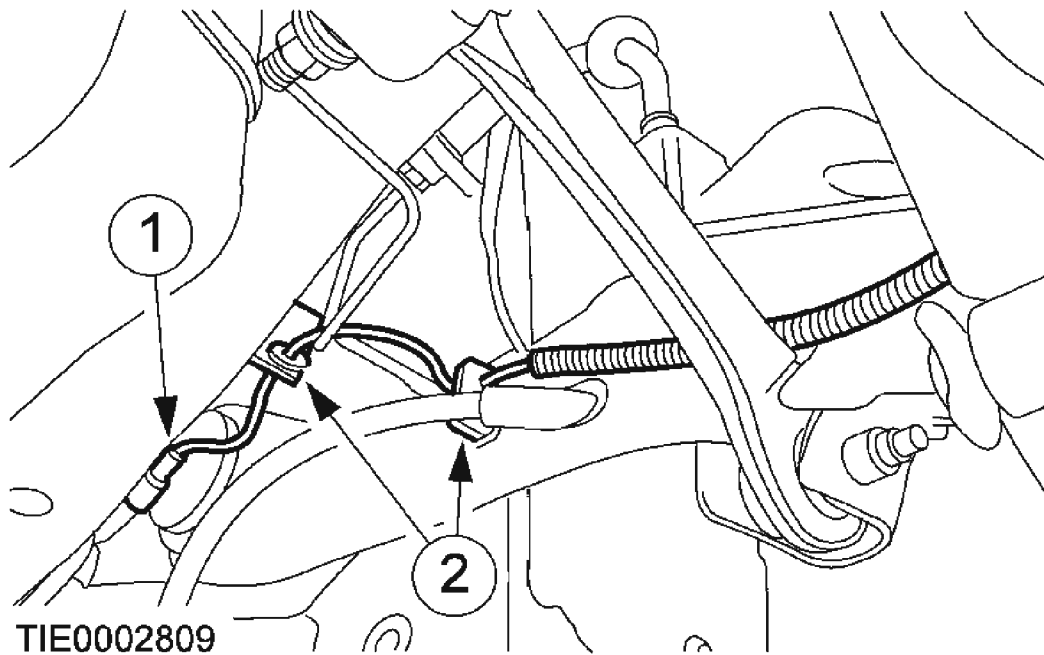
Disconnecting Wheel Speed Sensor Wiring Harness
